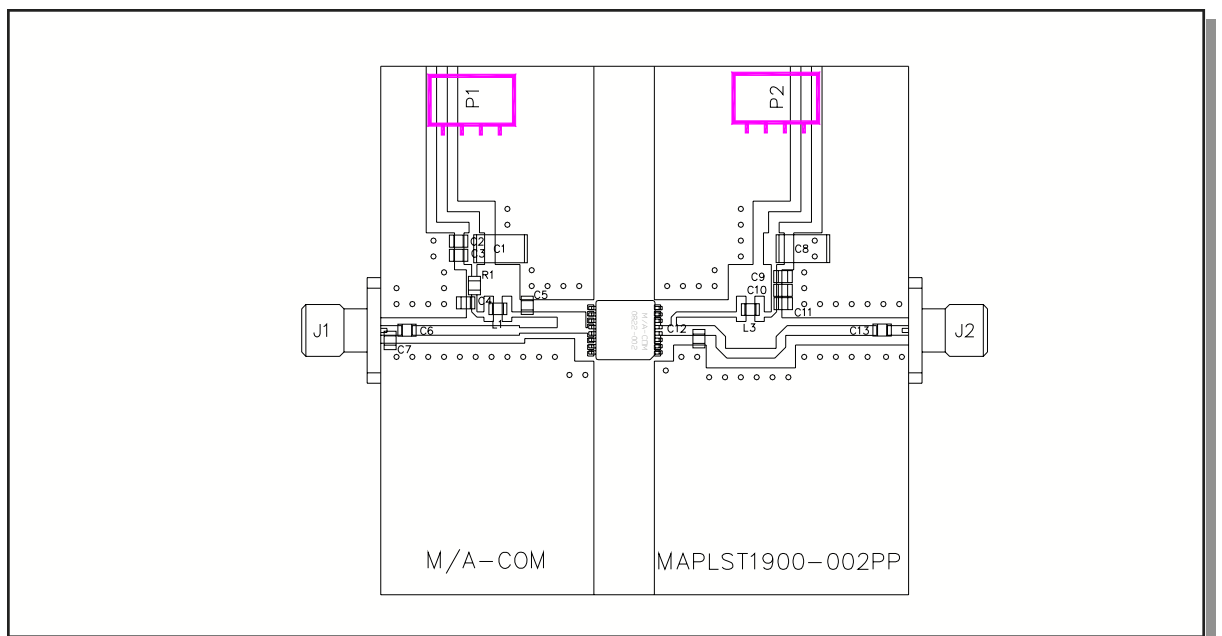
1880—1920 MHz Test Fixture Component Layout
